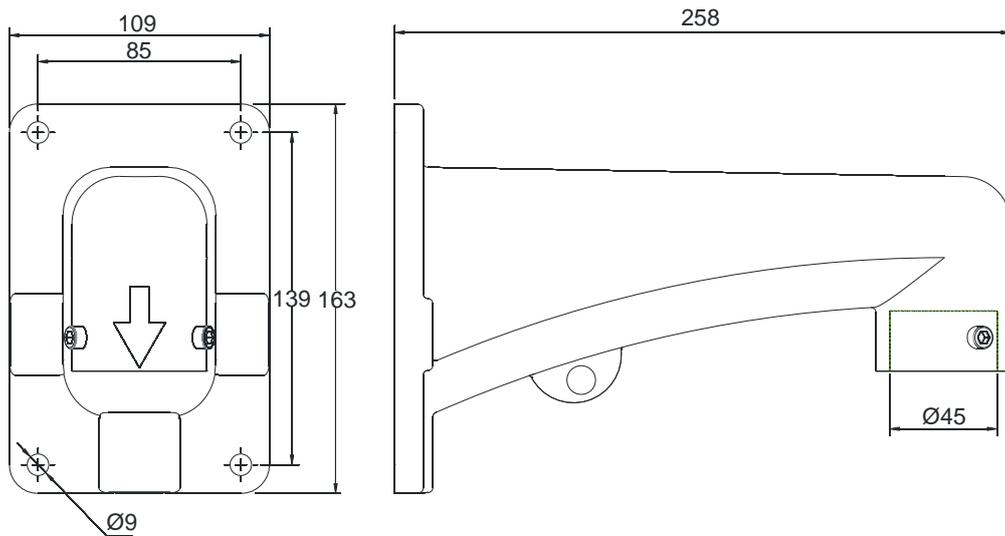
picture of dimensions of wall-mounted installation arm
